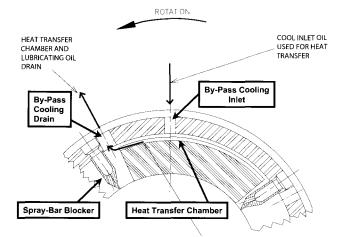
Behind-the-Pad By-Pass Cooling, Pad Schematic.
